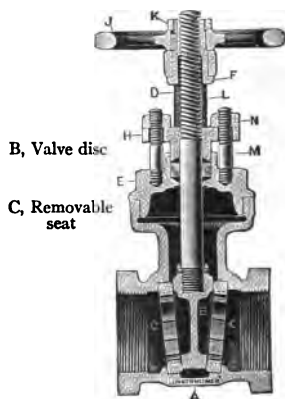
Gate Valve, Outside Screw, Rising Stem.
